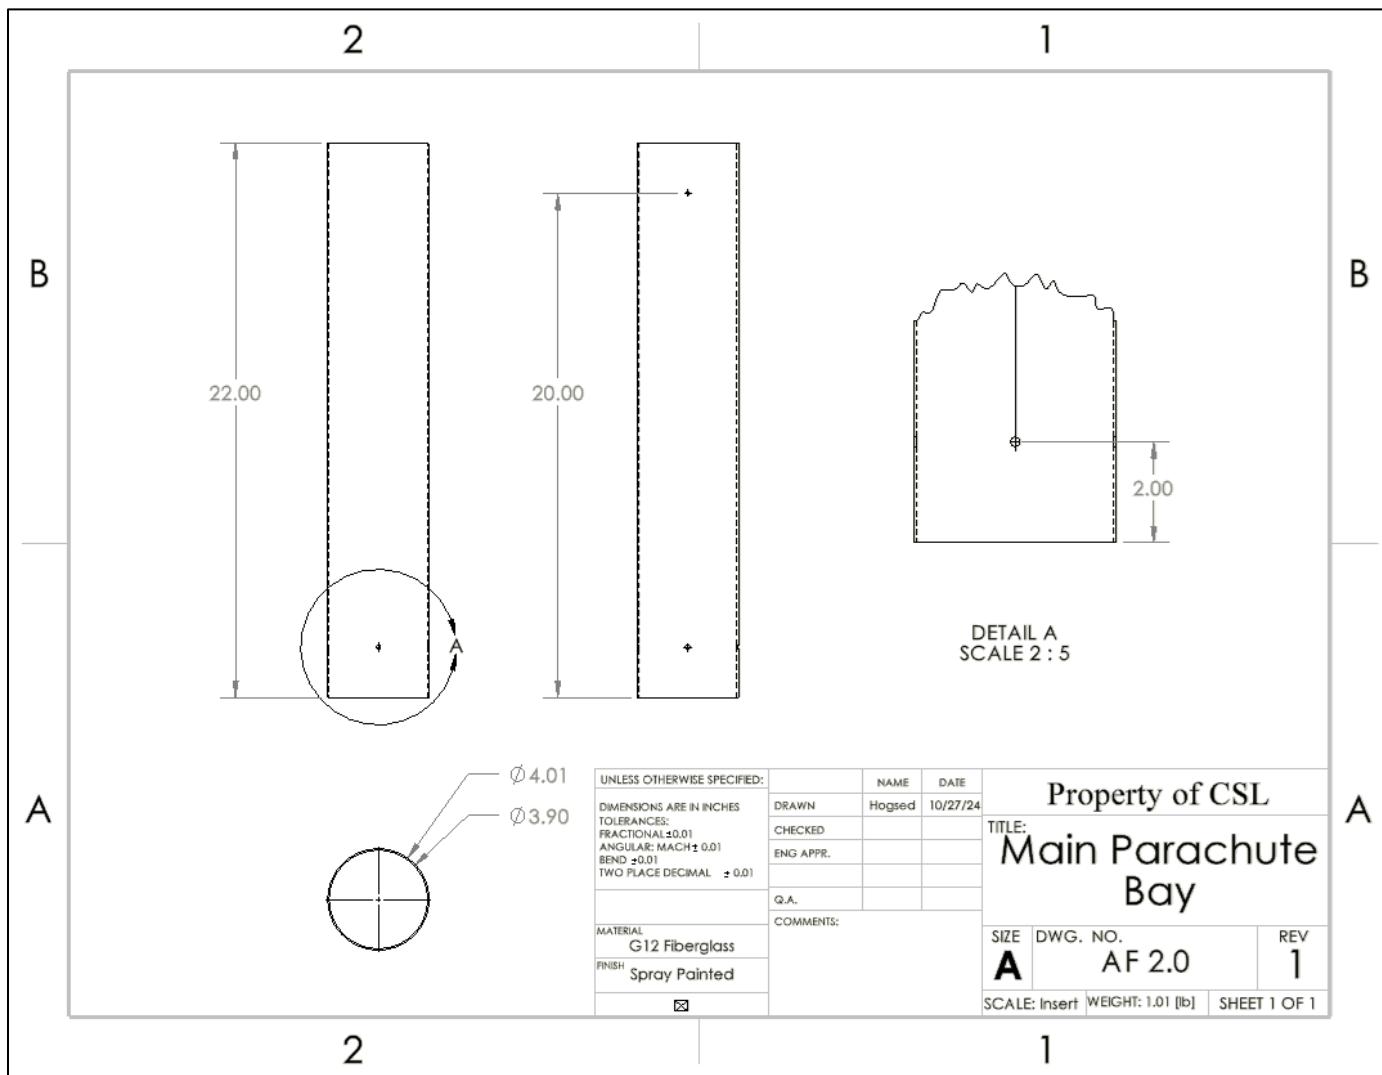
SOLIDWORKS drawing of the main parachute bay.
